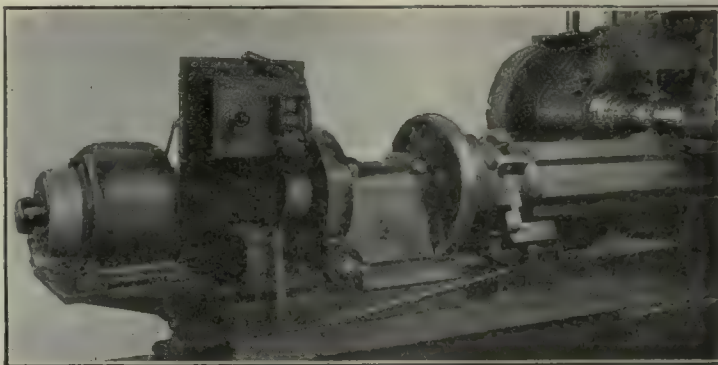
MOTOR-DRIVEN INDEXING HEAD FOR MILLING OPERATION
